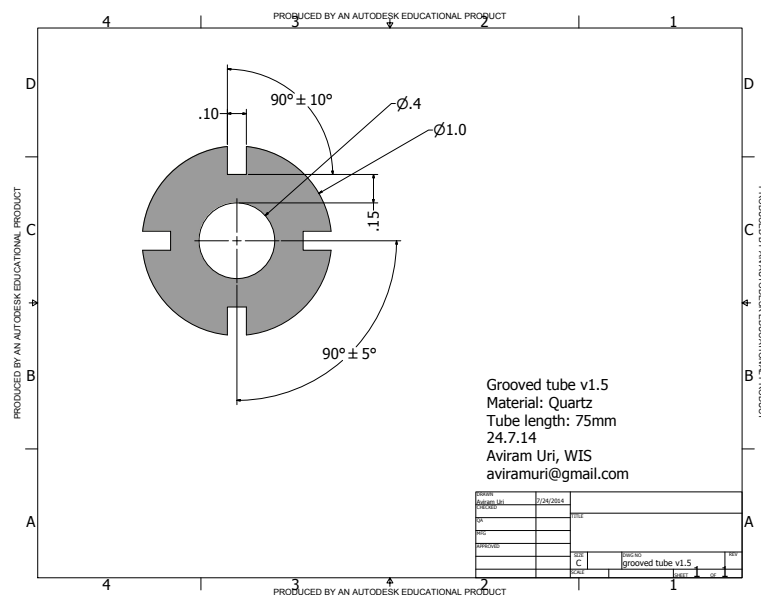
MSOT quartz tube design. The tubes were fabricated by the company F&D.
